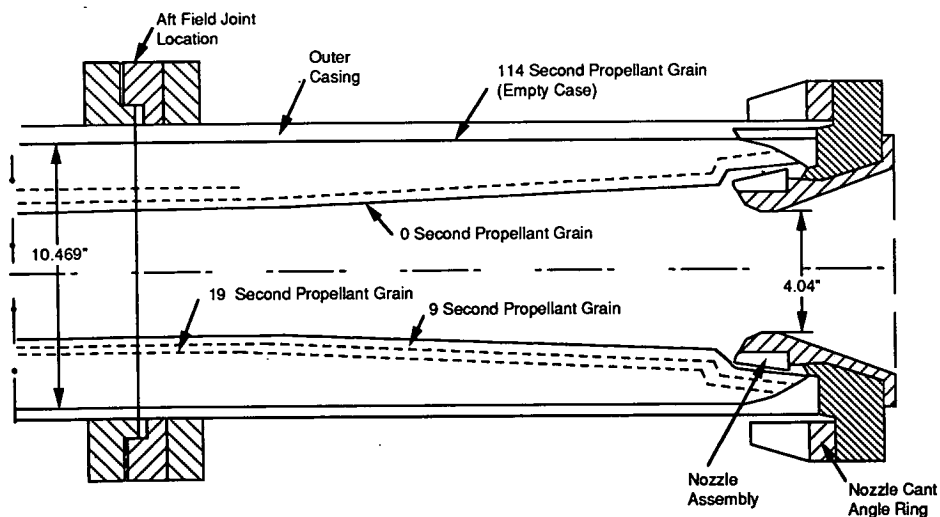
SPACE SHUTTLE SRM MODEL ASSEMBLY
